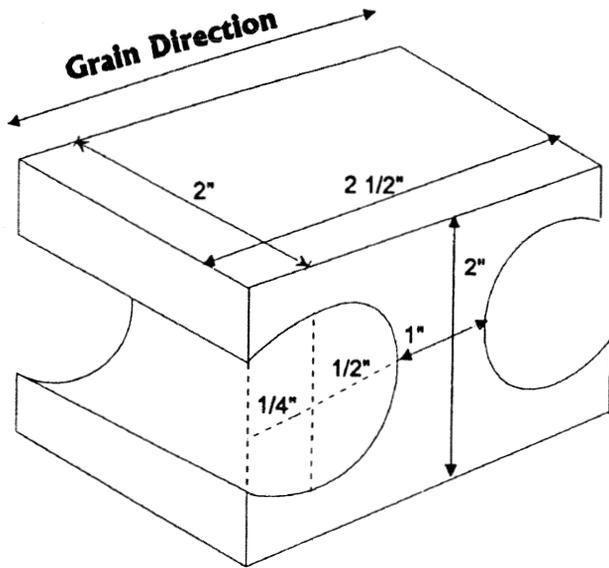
ASTM D143-83 test specimen for tension perpendicular to the grain.
